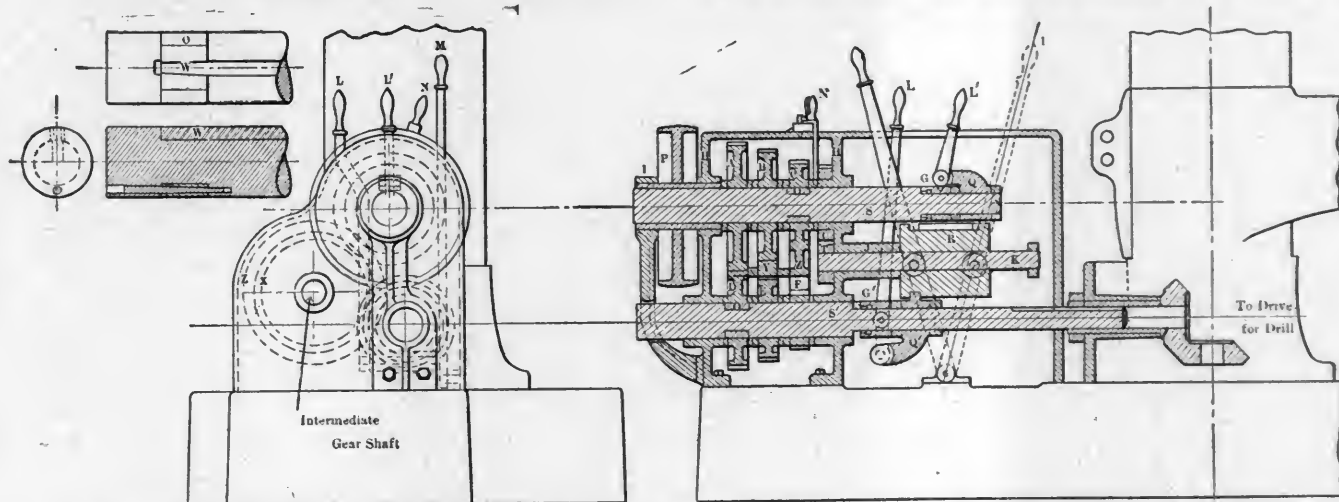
SECTIONAL VIEW OF SPEED BOX, SHOWING ARRANGEMENT OF GEAR TRAINS AND DETAILS OF FRICTION CLUTCHES.
